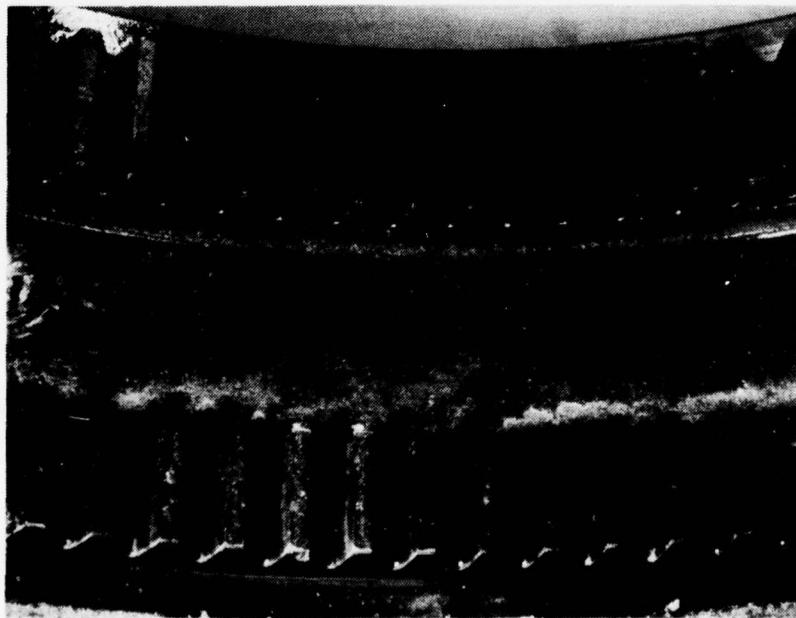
Upper ring gear teeth (top) and lower ring gear teeth (bottom) after 19-minute loss-of-lube test of transmission number 2.
